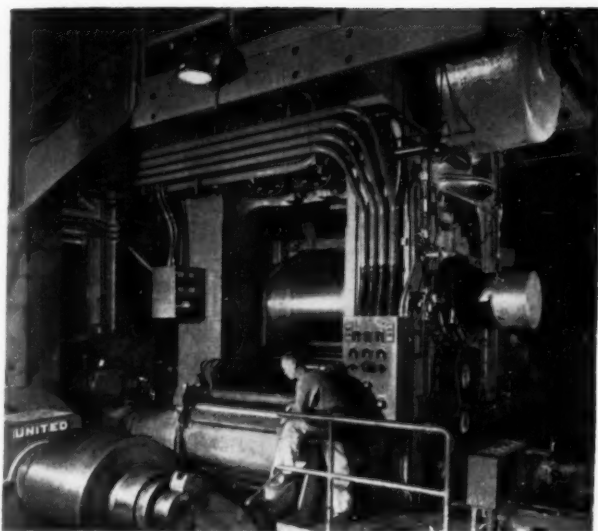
EXIT SIDE OF SINGLE-STAND FOUR-HIGH SHEET-TEMPER MILL
